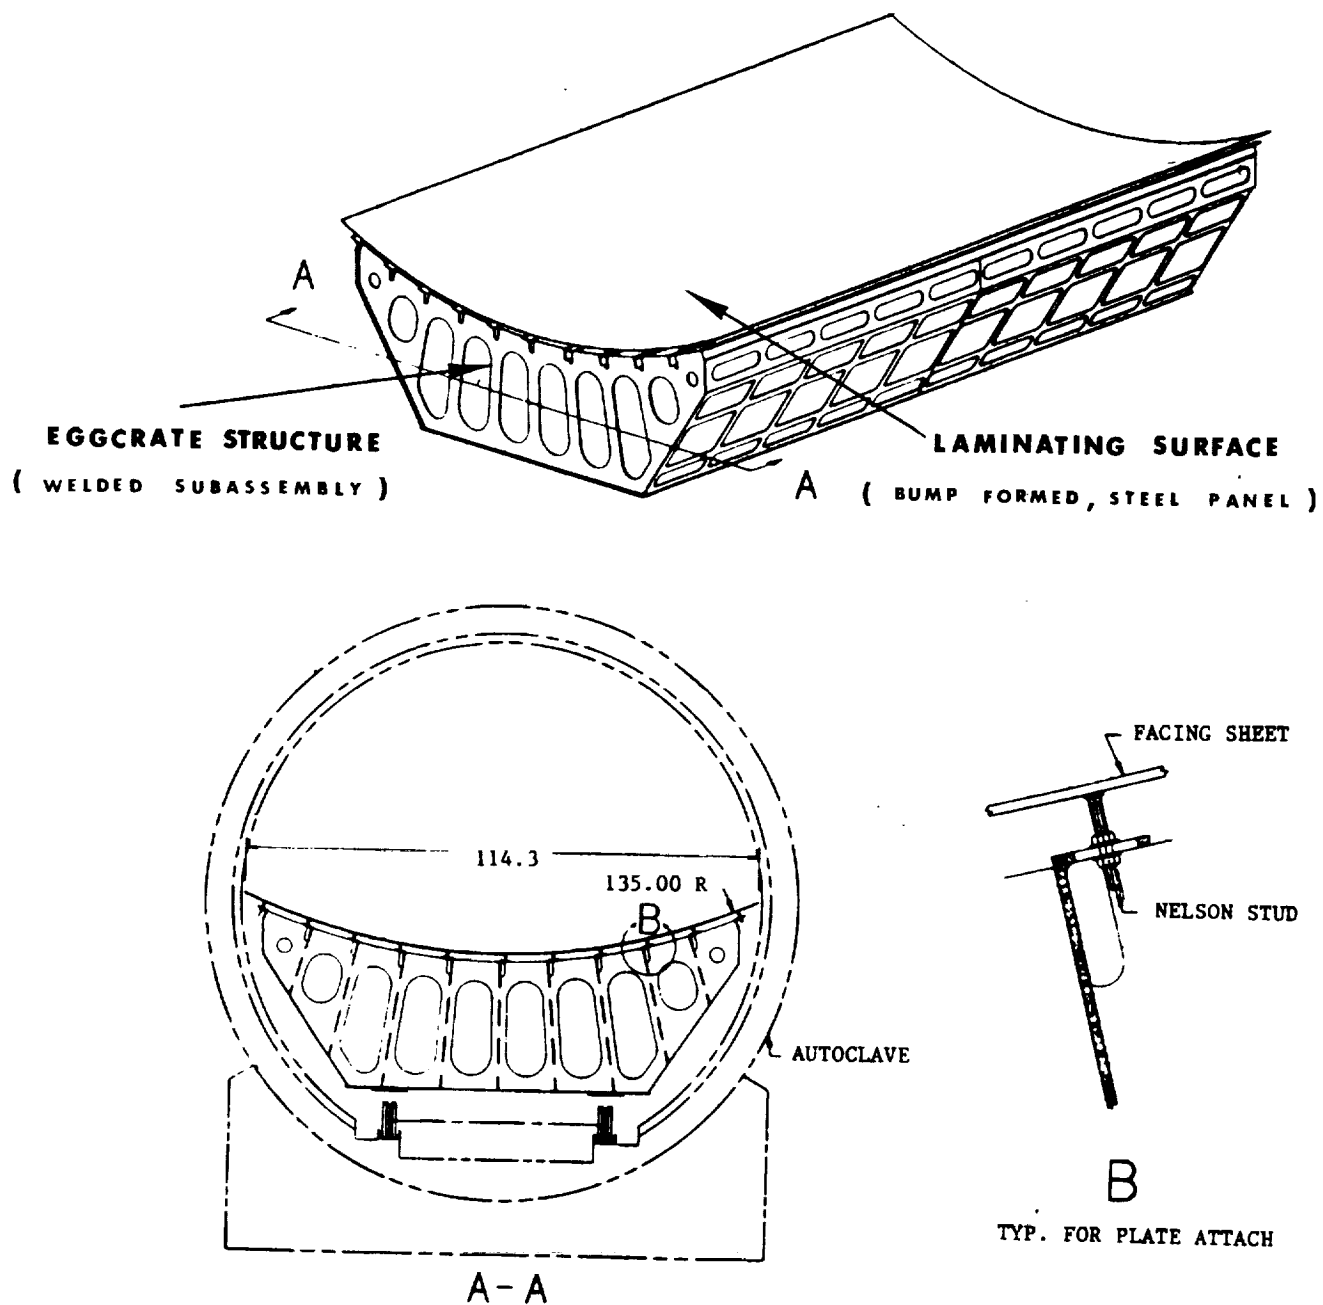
DEMONSTRATION PANEL BONDING JIG
